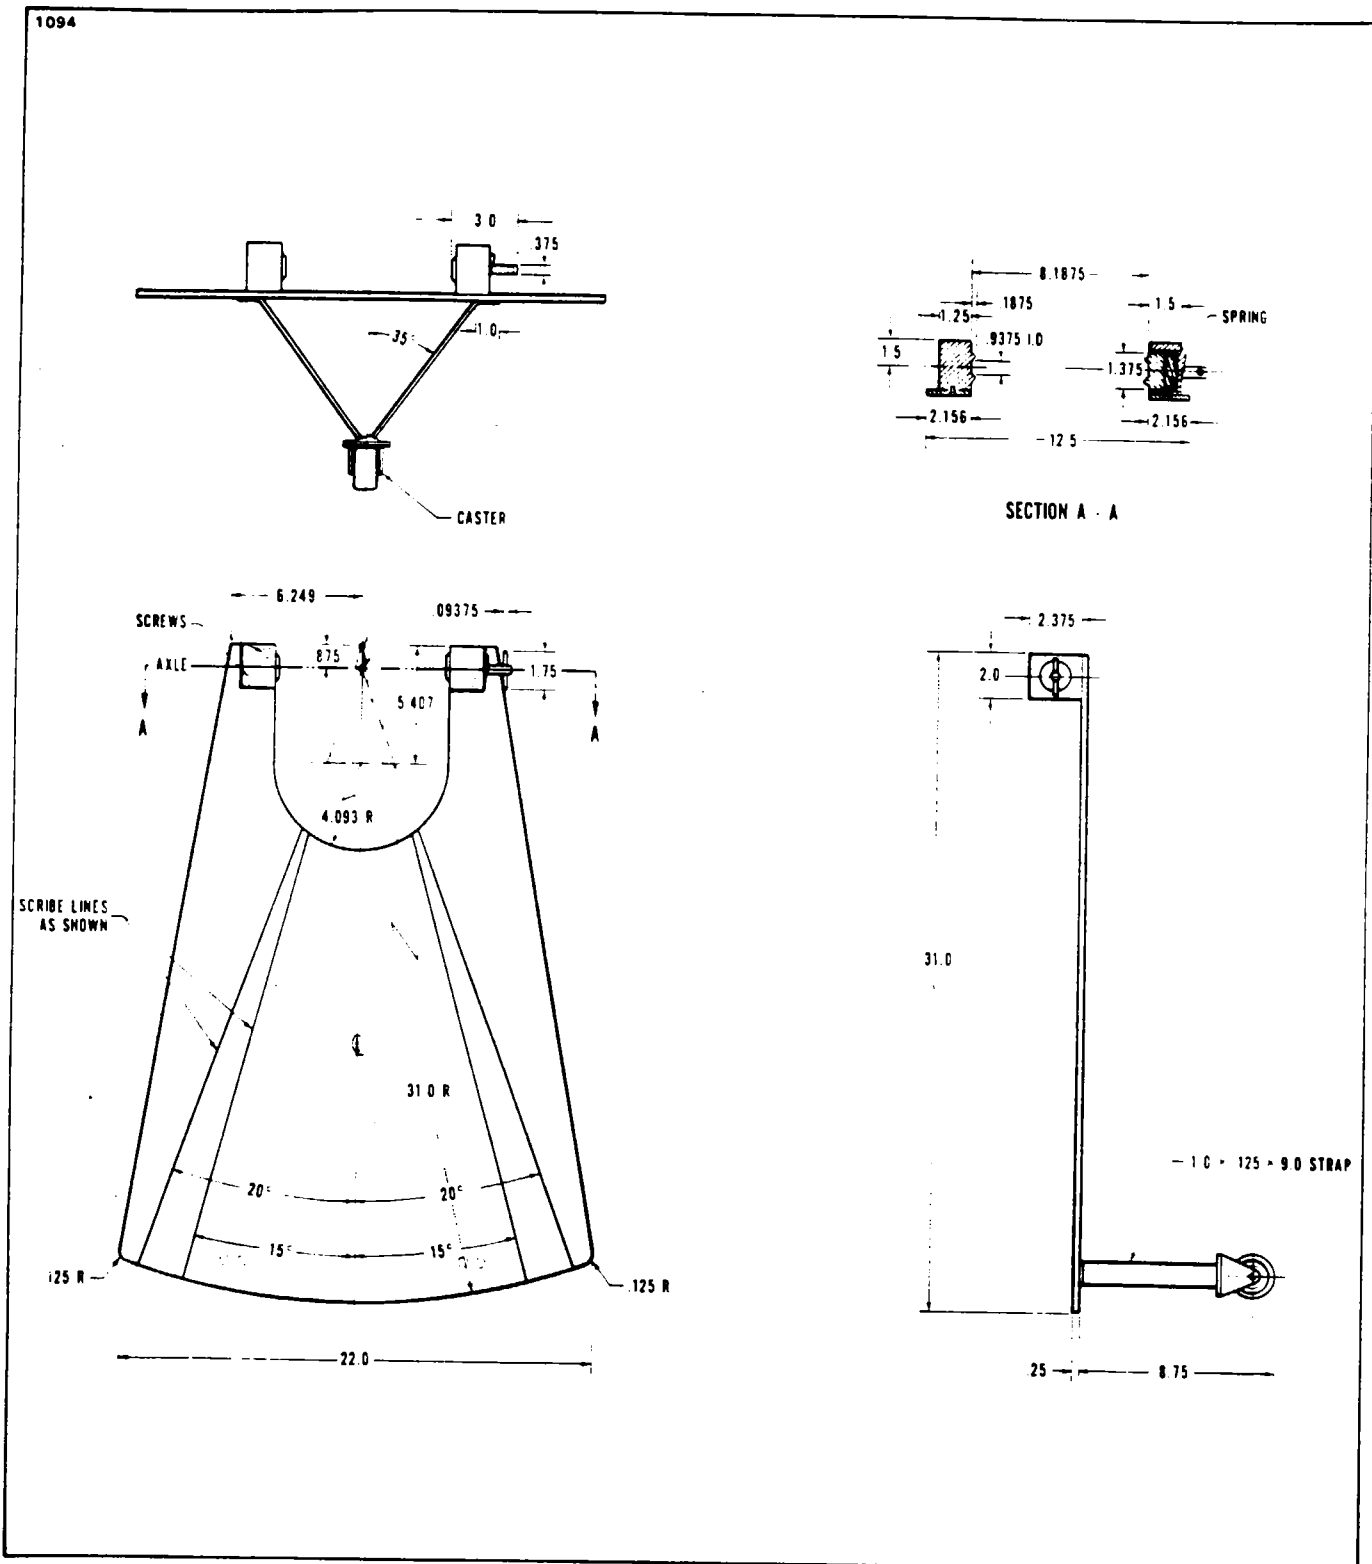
Fabricated Tool, Checking Nose Wheel Alignment
